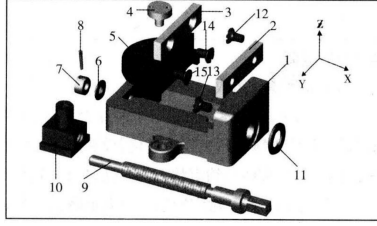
The assembly exploded diagram of a vise (Hu et al., 2010).
